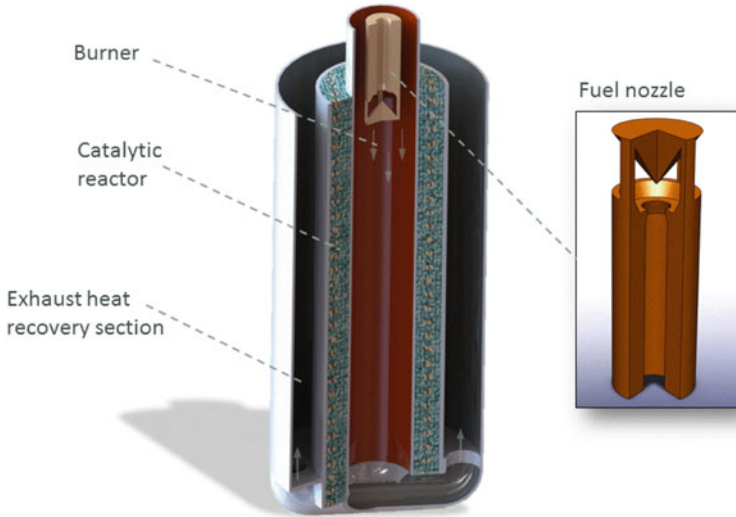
Schematic a fuel processor reactor integrated with a fuel burner and heat recovery section for the hot exhaust gas
